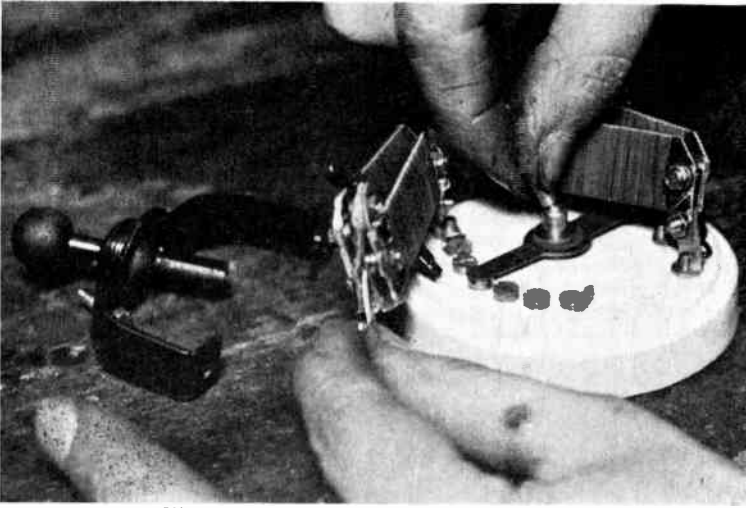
HOW A DIMMER IS CONSTRUCTED.
